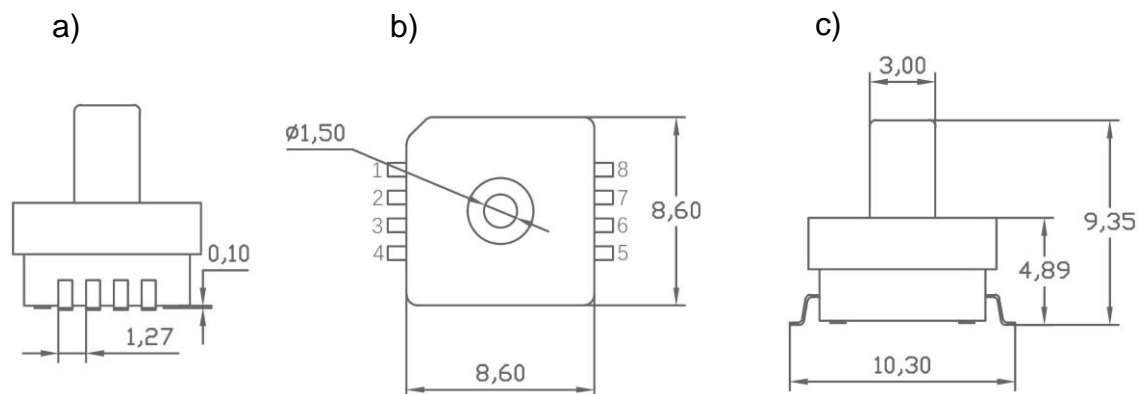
Mechanical dimensions in mm a) pin side view; b) Top view; c) Side view
